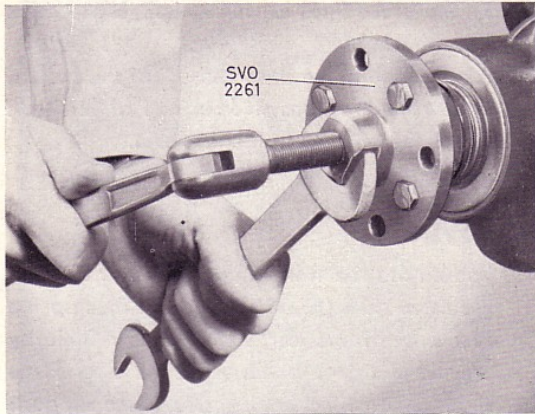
Removing the flange, PV 544 and late production P 120, P 1800.
